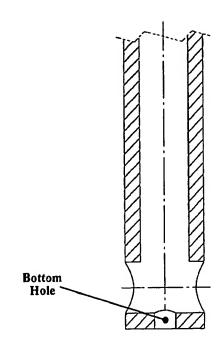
Section View of a Casting Nozzle with Bottom Hole
